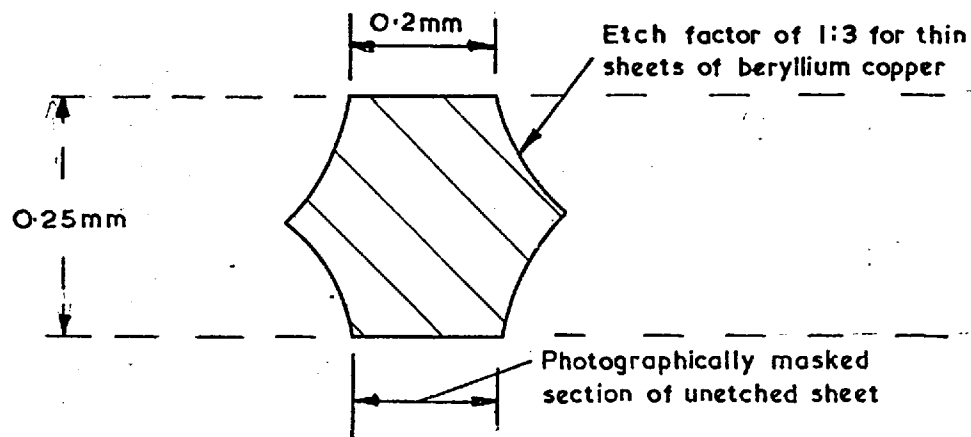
Cross-section detail of "posts" in reactive grids formed by chemical milling techniques
